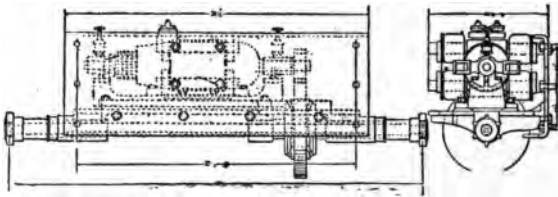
Holtzer's Electric Motor and Gear (Plan).
